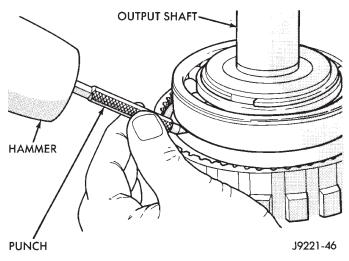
Marking Annulus Gear And Output Shaft For Assembly Alignment
